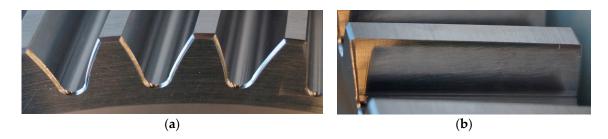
Quality of the soft manufactured test gear: (a) transverse view on the gear profile; (b) lateral view on the gear flank.
